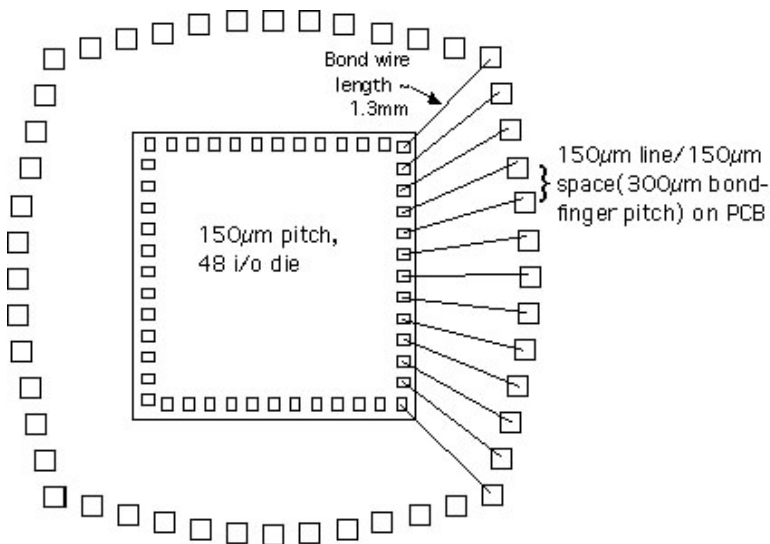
Drawing of 150µm pitch die with fanout to 300µm pitch bondfinger on the PCB. The drawing shows only one side of the wirebonds in place. The 300µm pitch on the PCB allows the design to stay above the minimum line and space fabrication design rules for low cost PCBs. Assuming a wire diameter of 25µm, the wire length is also well within the optimum length of 100 x diameter of the wire. Note that in this example, all bondwires are designed to be the same length. (The length is the projection of the bond wire onto the plane of the PCB surface).
